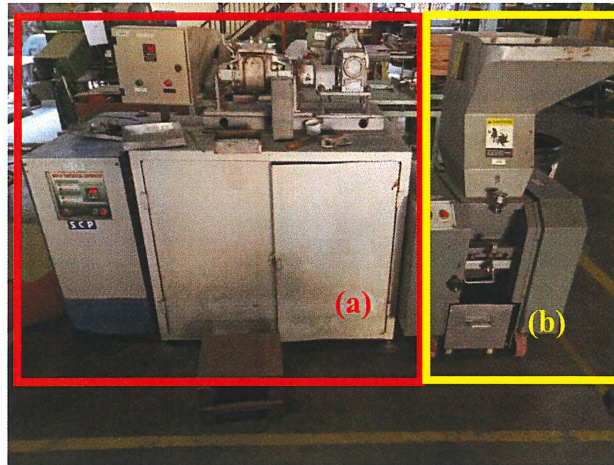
(a) Plastic mixing machine (b) Grinding machine
